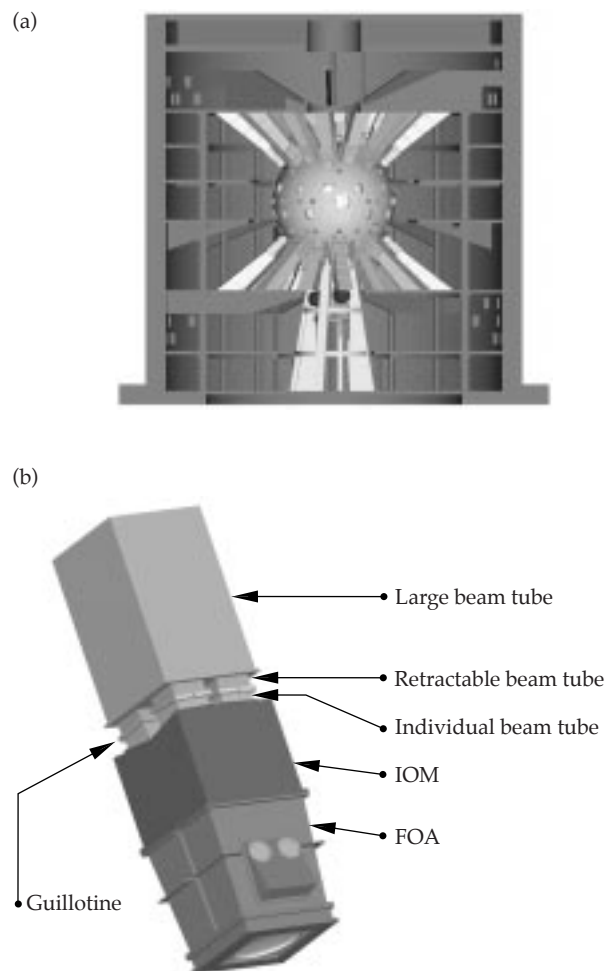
(a) Beam tube location between the FOAs and the mirror room floors. (b) A 2×2 section connecting to a retractable 1×1 section. (40-00-1097-2289pb01)
